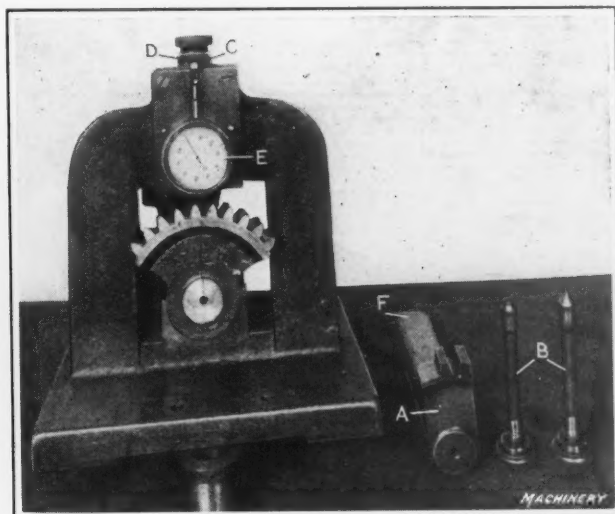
Fixture used for testing Root, Pitch, and Throat Diameters of Worm-wheel Sector for Steering Gear. Three Plungers are used interchangeably for making these Measurements
